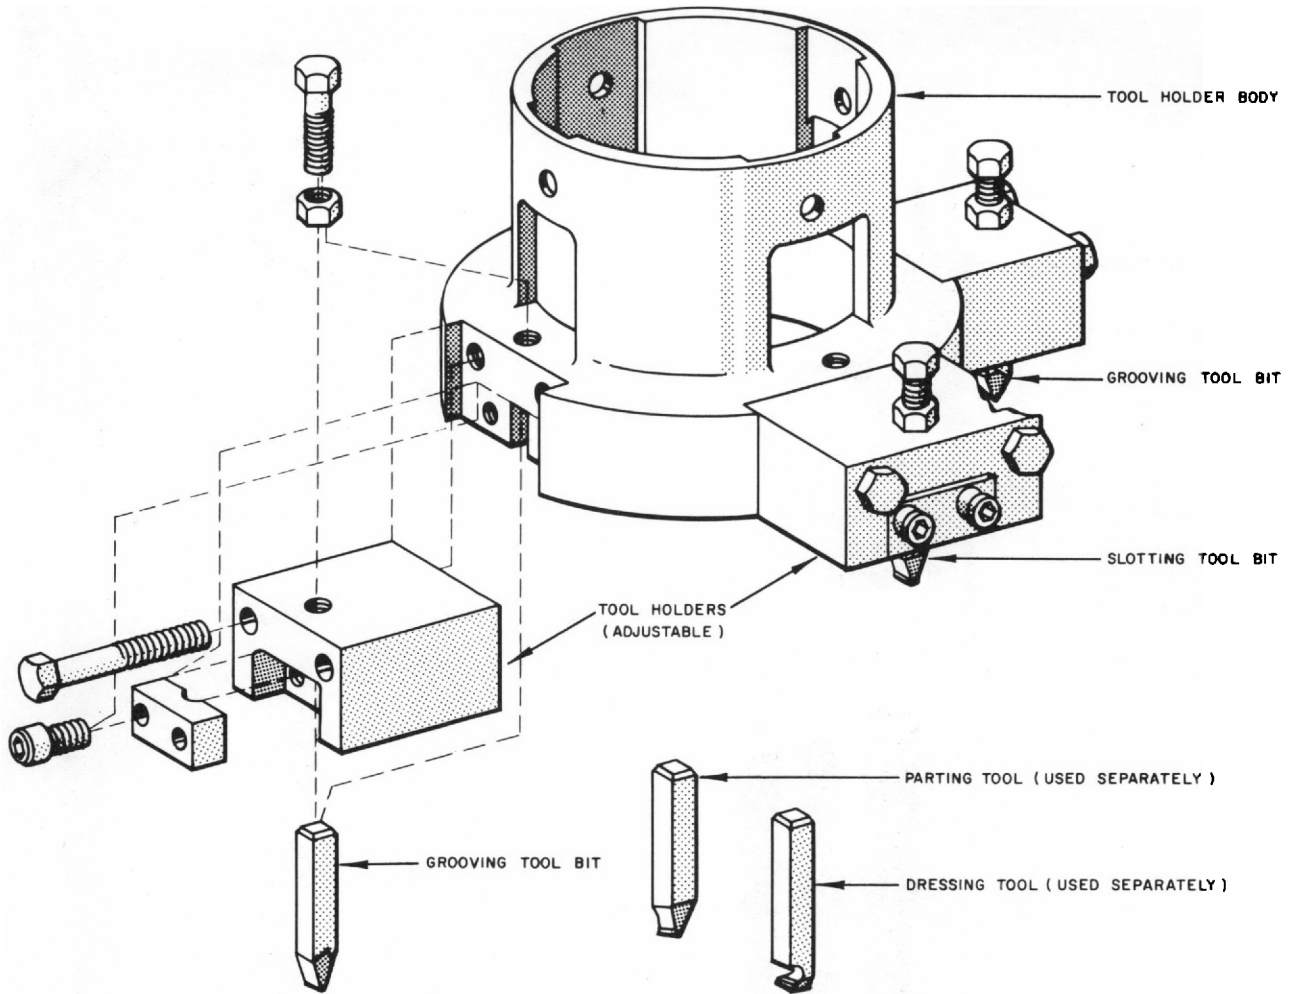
Seal Weld Cutting Machine Tool Holder.
